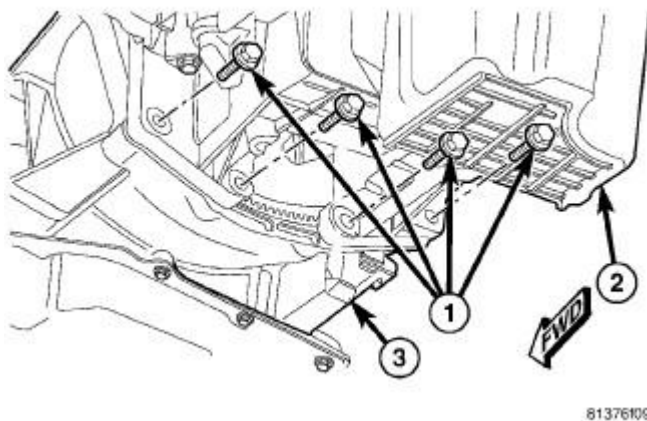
Removing/Installing Engine Oil Pan To Transmission Bolts - 3.5L
